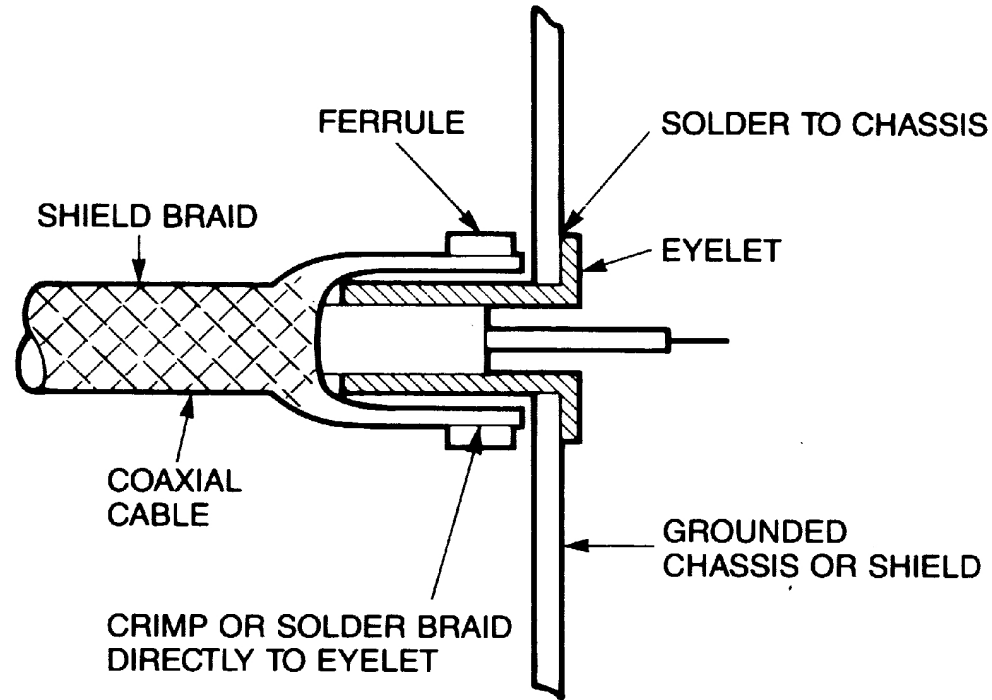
One method of terminating a cable with 360° contact to the shield.
